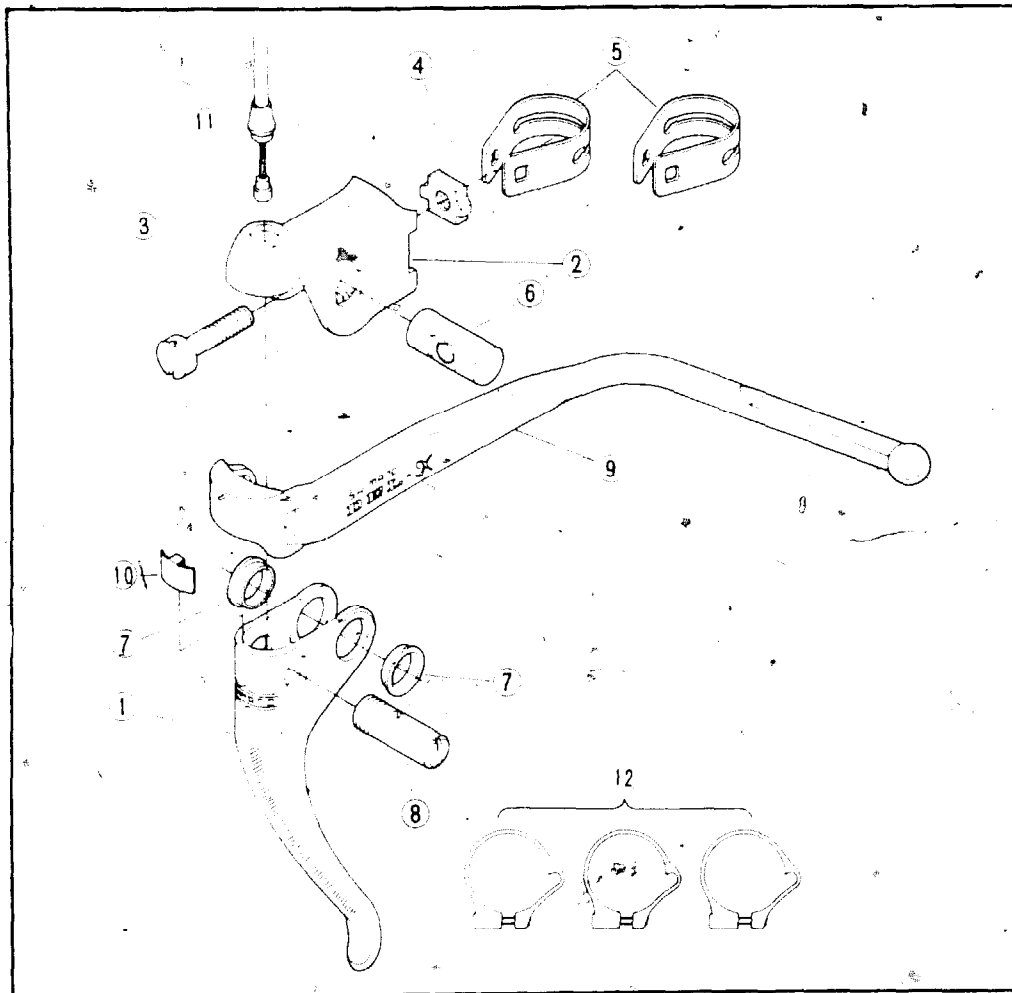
Shimano Model MB-110 brake lever with extension lever. Parts are: (1) lever, (2) lever bracket, (3) pull up bolt, (4) pull up-nut, (5) clamp, (6) pull up stud, (7) flanged thrust washer, (8) cable anchor stud, (9) extension lever, (10) extension lever spring, (11) cable set and (12) outer band for one-inch tube.
